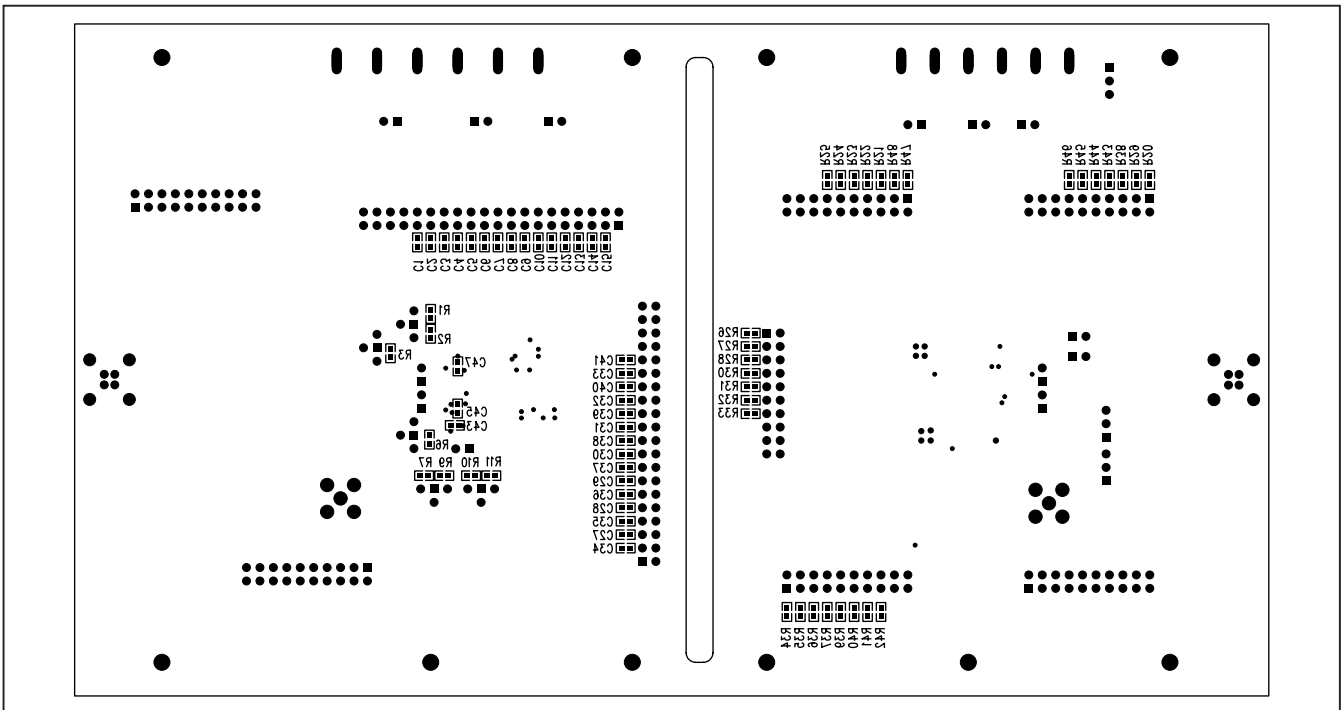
MAX9217/MAX9218 EV Kit Component Placement Guide—Solder Side
